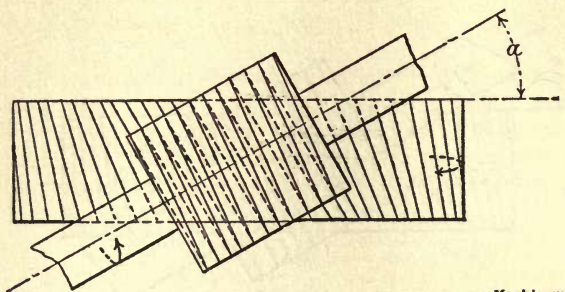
Cutting a Left-hand Spiral Gear with a Left hand Hob
